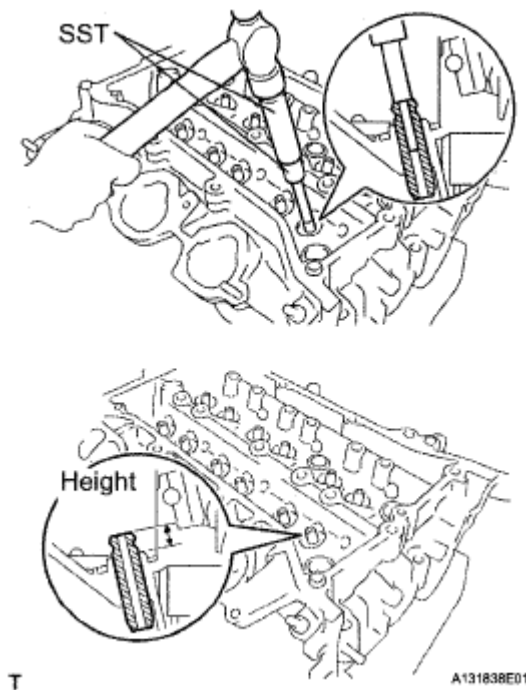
Tapping Valve Guide Bush To Specified Protrusion Height
